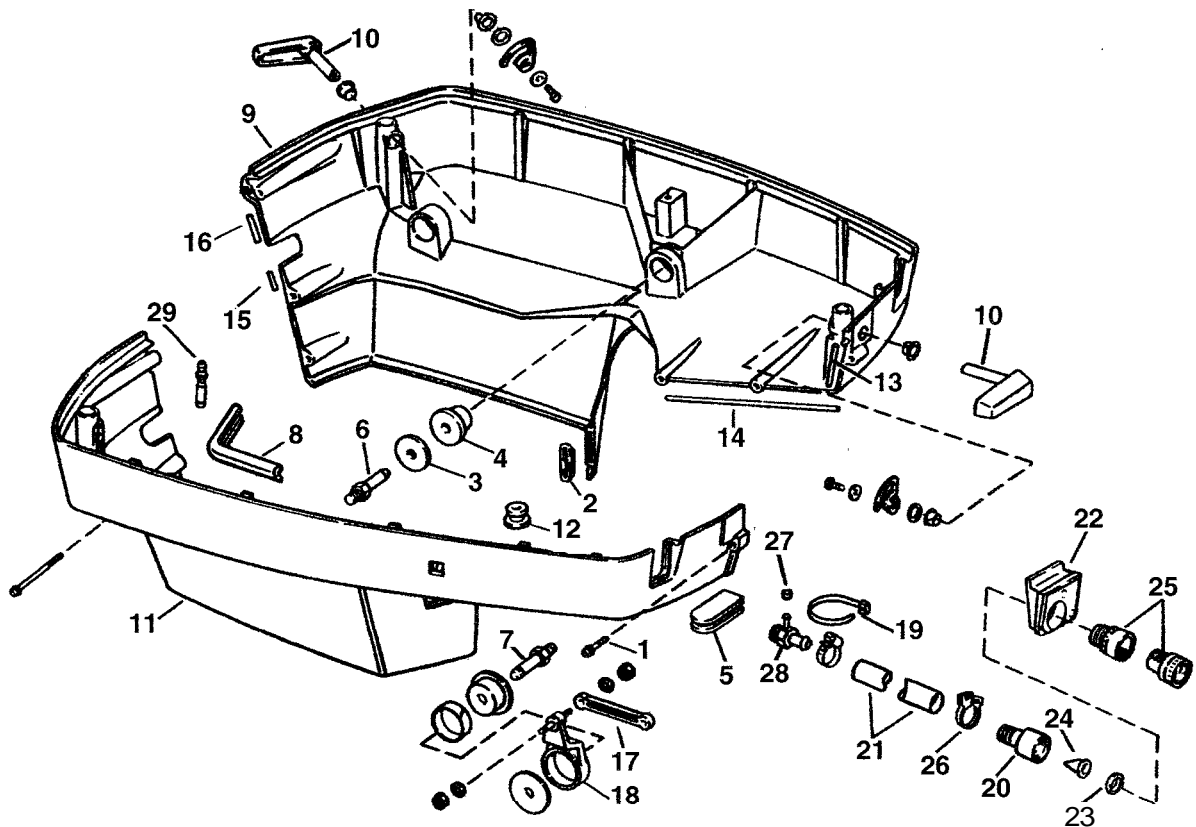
Exploded view of the lower engine covers and related components-120-140Hp (2000cc) V4 motors
